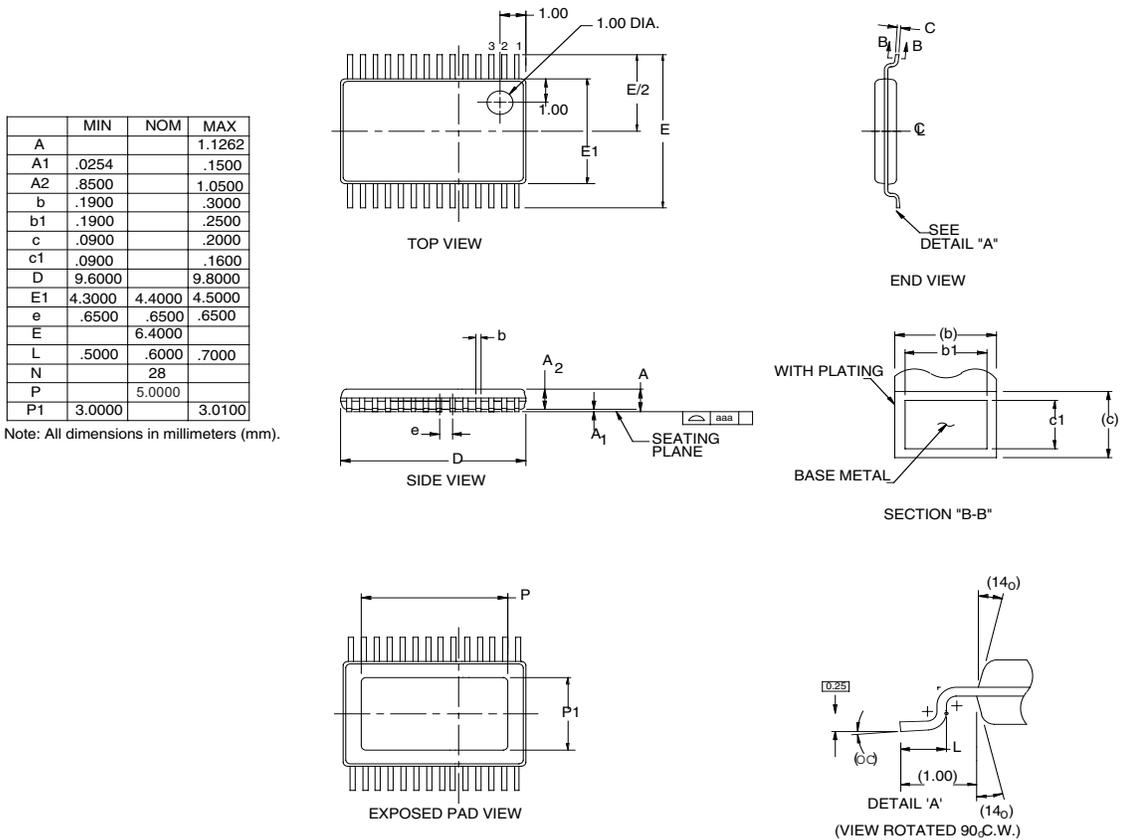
TSSOP-28 Downpaddle Package Mechanical drawing
